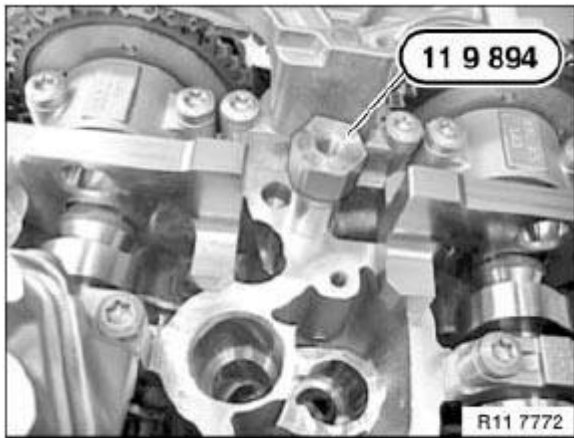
Identifying Special Tool 11 9 894 On Cylinder Head
